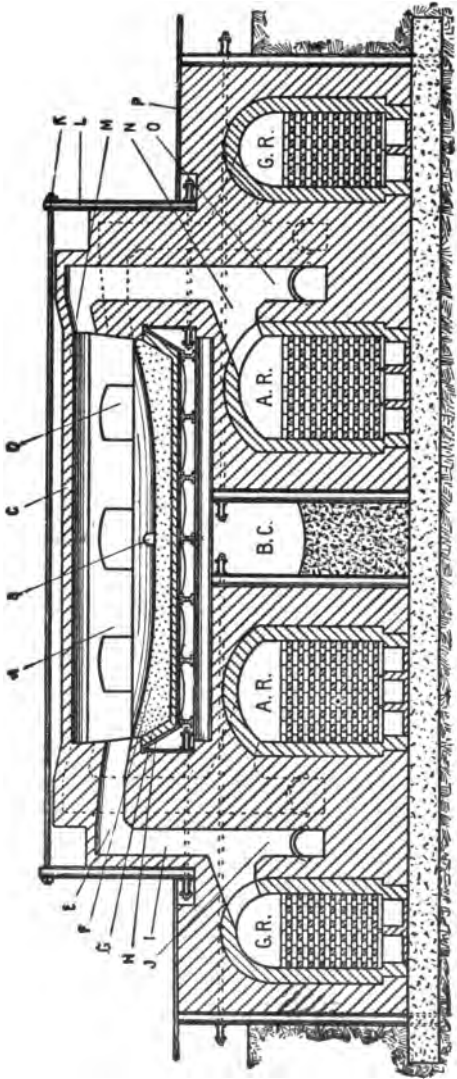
Siemens Furnace—Vertical Longitudinal Section.
